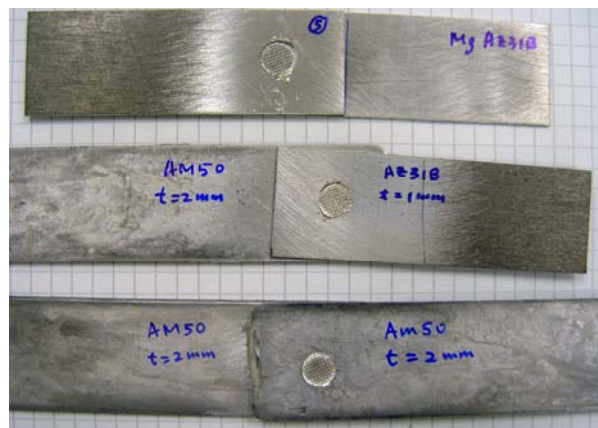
Appearance of ultrasonic welds. Top weld: AZ31B to AZ31B ($t=1$ mm); middle: 2 mm AM50 to 1 mm AZ31B; bottom: AM50 to AM50 ($t=2$ mm).
